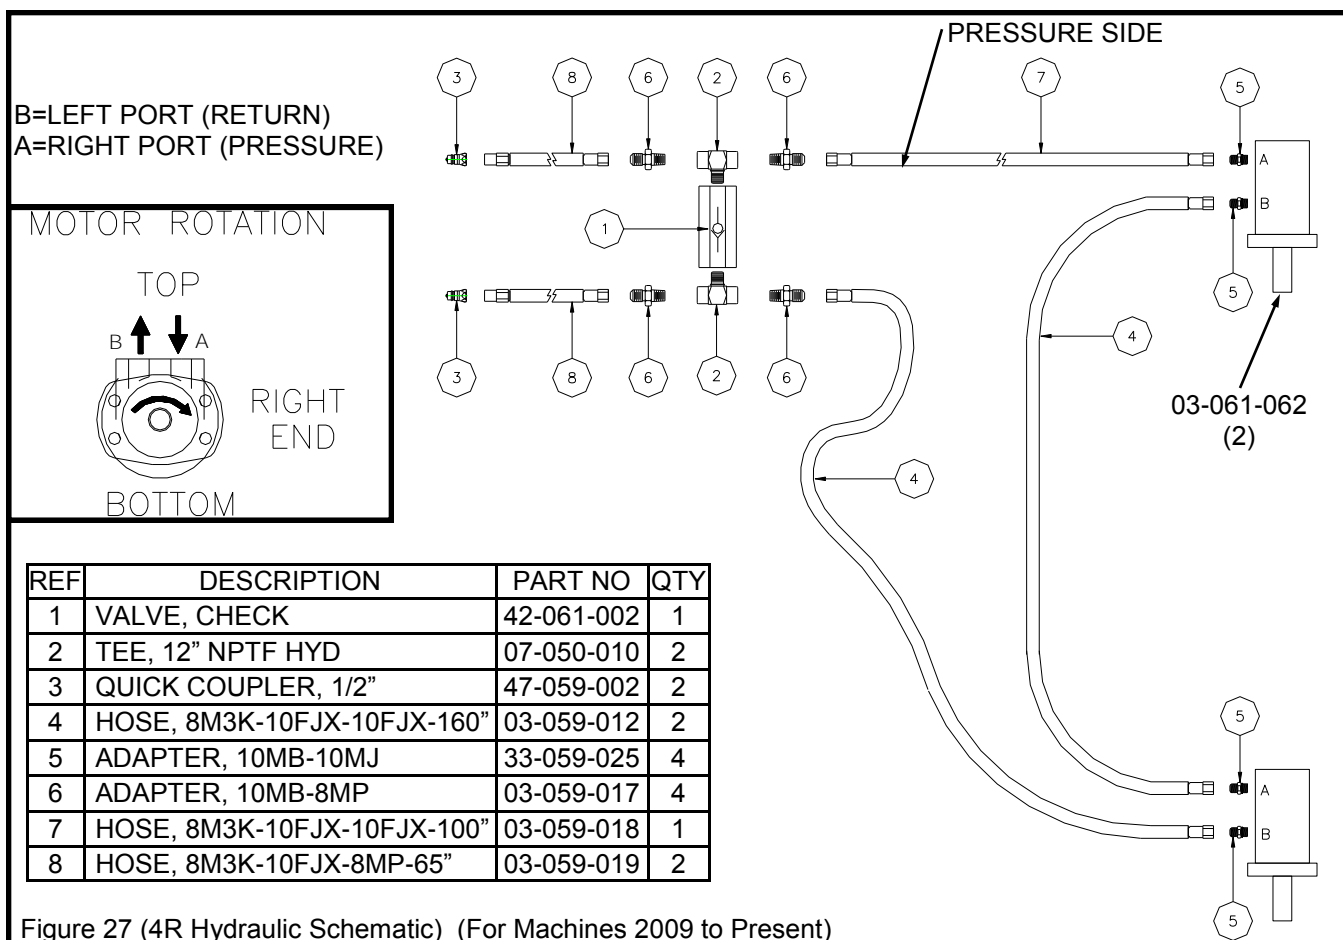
(4R Hydraulic Schematic) (For Machines 2009 to Present)
